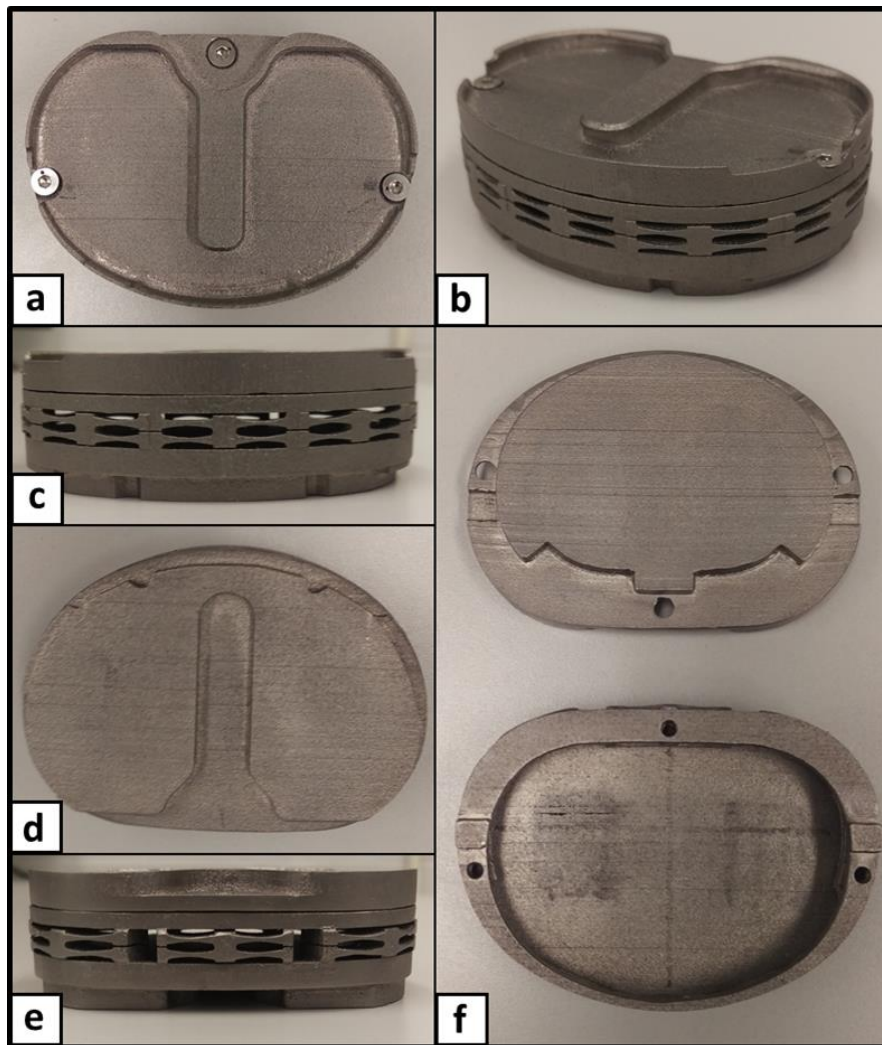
Package Prototype: (a) top view, (b) isometric view, (c) front view, (d) bottom view, (e) back view and (f) disassembled prototype.
